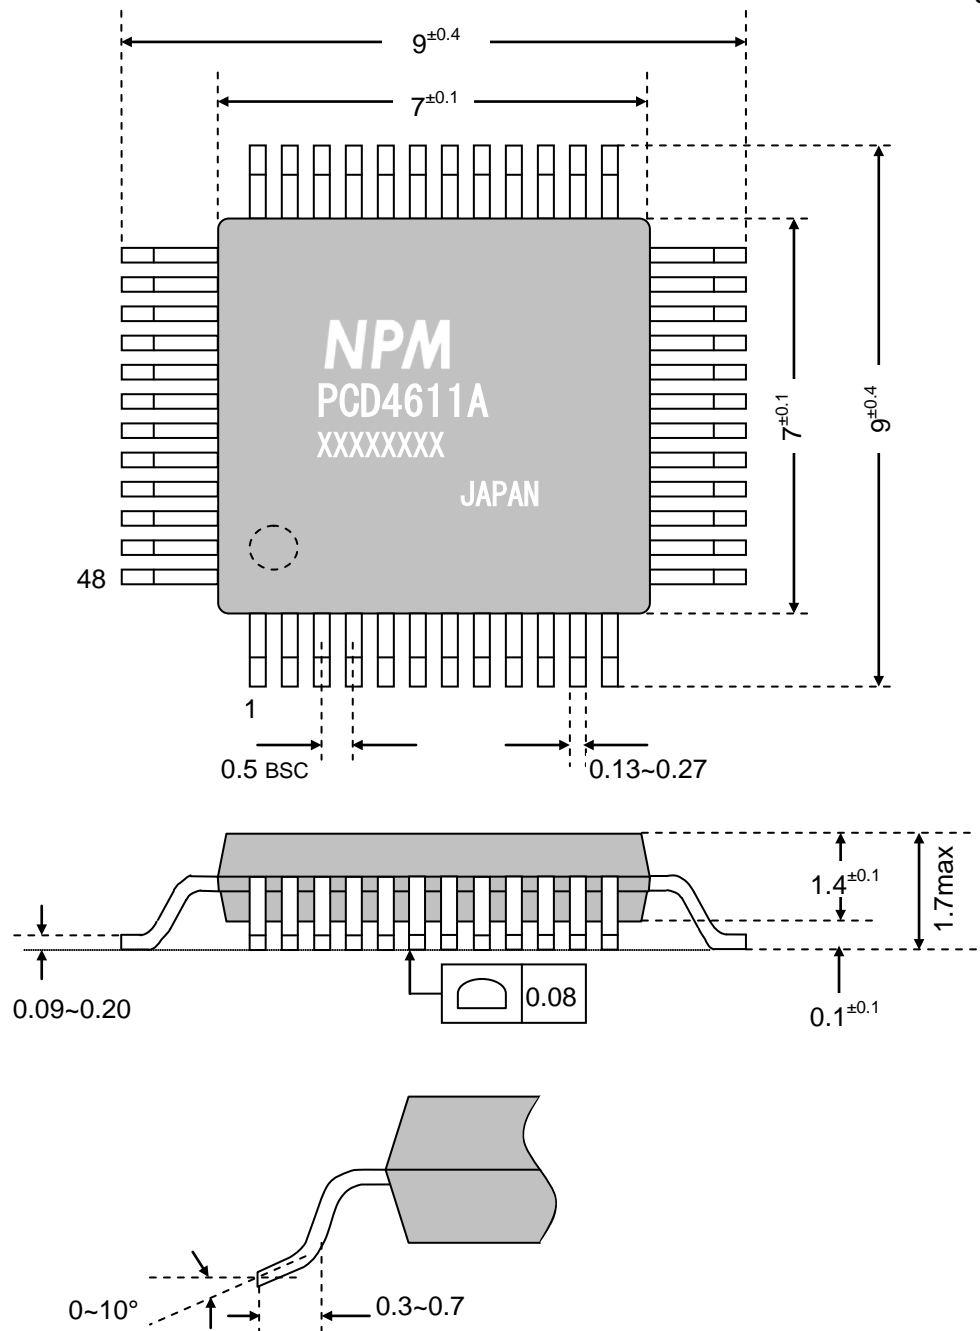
PCD4611A external dimensions (48-pin QFP)
